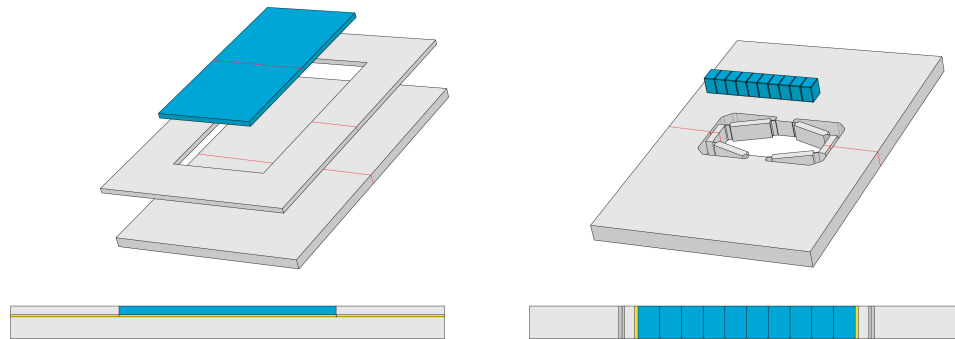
Top Left) design needed to fit a piezo patch inside the flexure Top Right) design needed to fit a stack. inside the flexure. Bottom Left) a front view of the design above housing the patch. Bottom Right) A front view of the design above with the stack. Grey is flexure material, blue is piezo and yellow is glue/epoxy.
